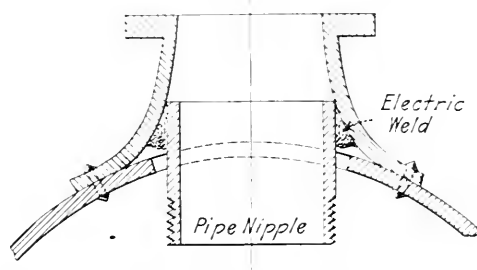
WELDED CONNECTION FOR INTERNAL PIPE TO NOZZLE
